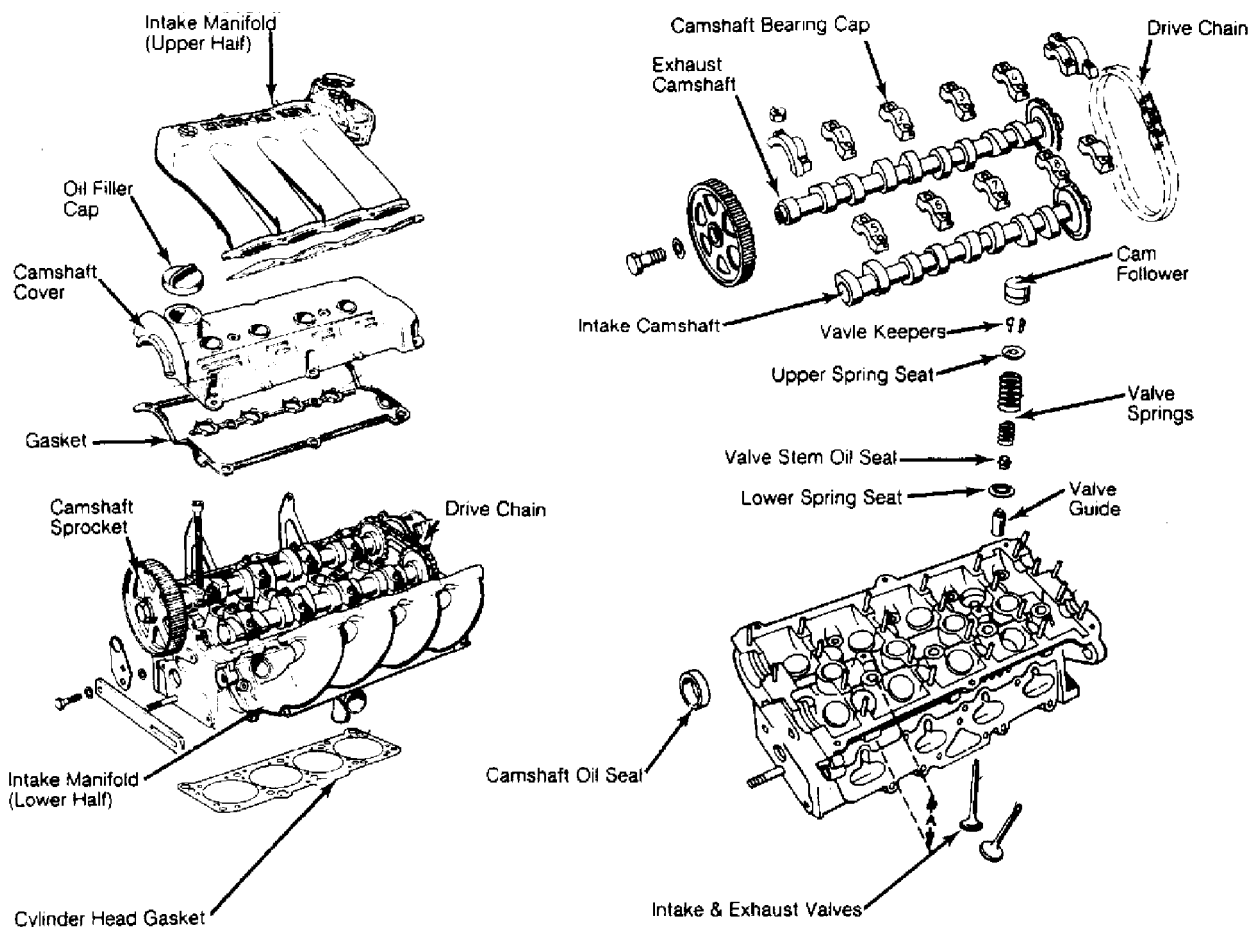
Exploded View of Scirocco 16 Valve Cylinder Head Assembly
